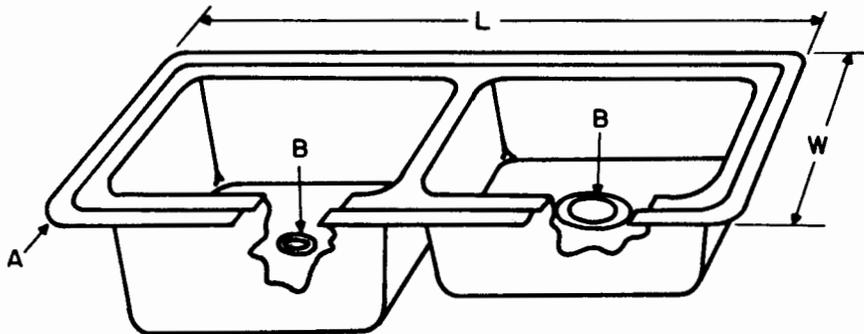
Kitchen sink outlet dimensions. (4.3.(2))
